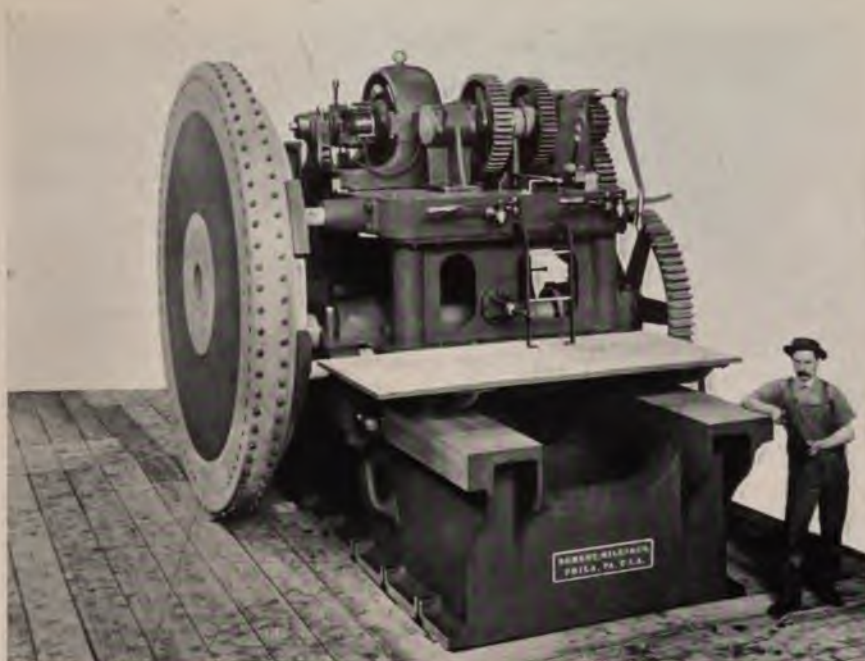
LARGE ROTARY PLANING MACHINE. (The Niles-Bement-Pond Co.)
